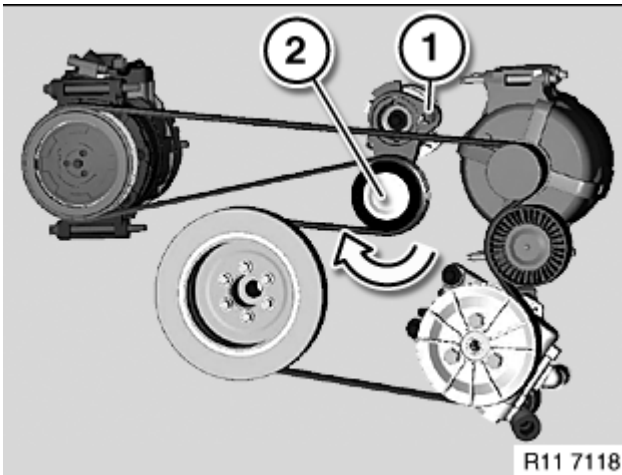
Drive Belt Tensioner, Mounting Screw And Removal Direction
